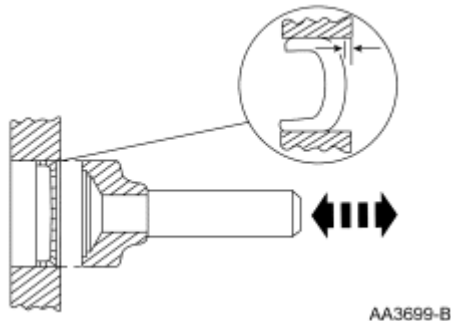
Seating Cup-Type Cylinder Block Core Plug
